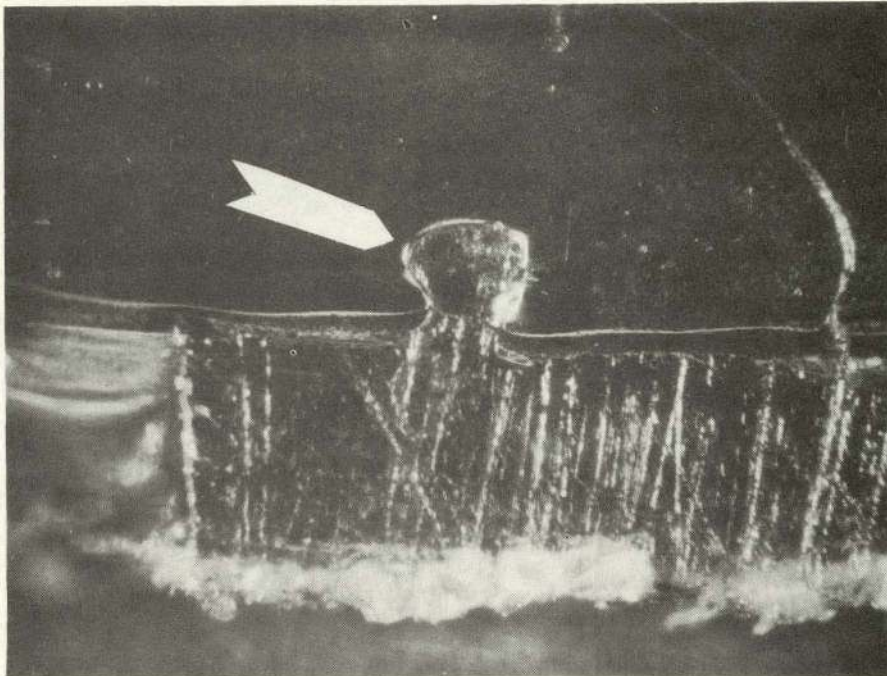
Fracture Surface of Plastic Compliance Specimen ABC-2 Showing Point of Fracture Initiation (Arrow) Which Occurred Ductilely by Tensile Shear. Initial Failure Is Raised Material Below Notch Surface and Ahead of Simulated Crack (100X)
